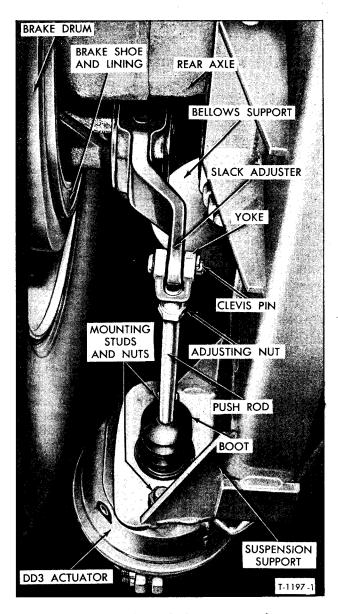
DD3 Rear Brake Actuator and Slack Adjuster Installed
